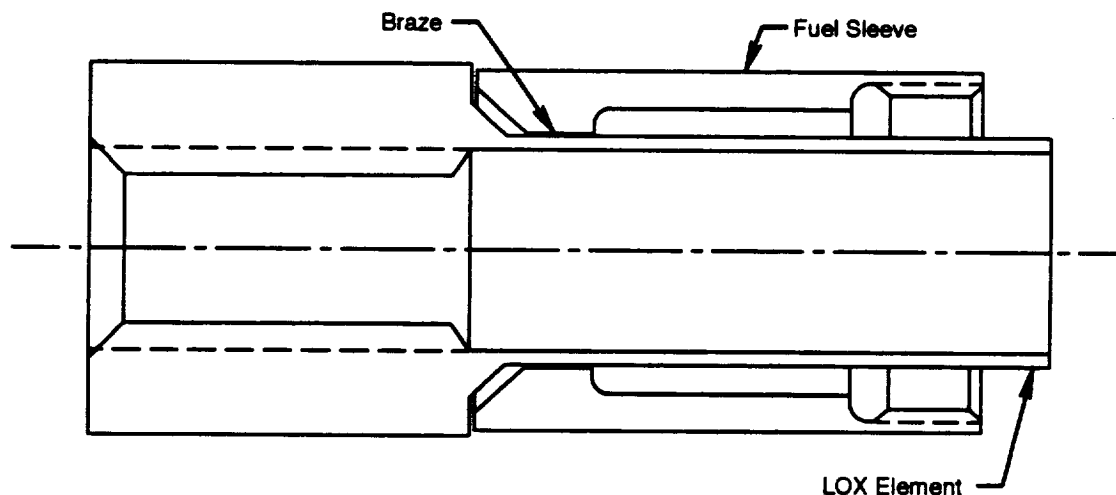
Typical Fuel Sleeve Braze Sample
